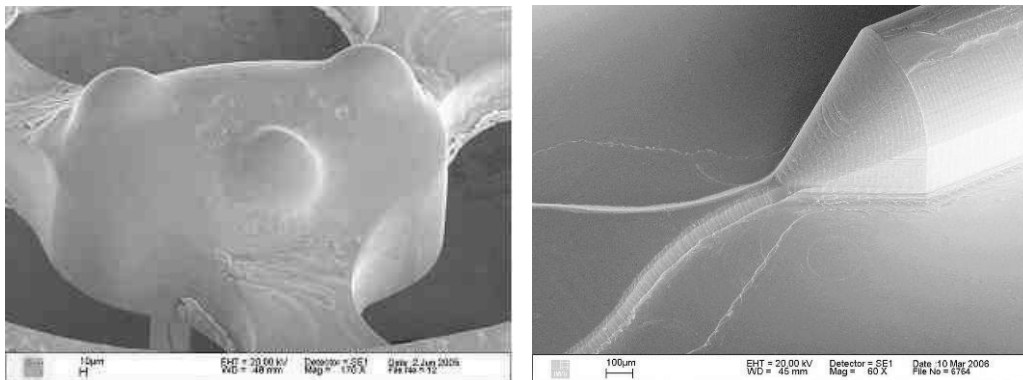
(a) Implant of ear section (titanium); (b) Detail of a hot-embossing tool with a female mould of a micro fluidic structure
